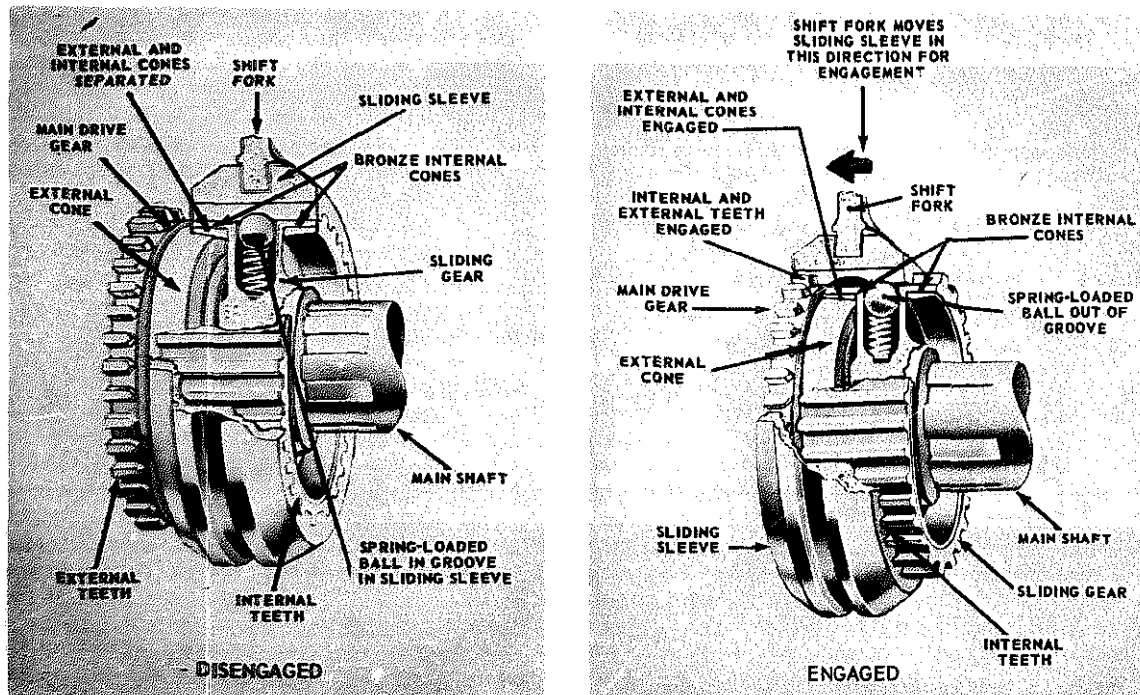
Synchronesh clutch—disengaged and engaged.
